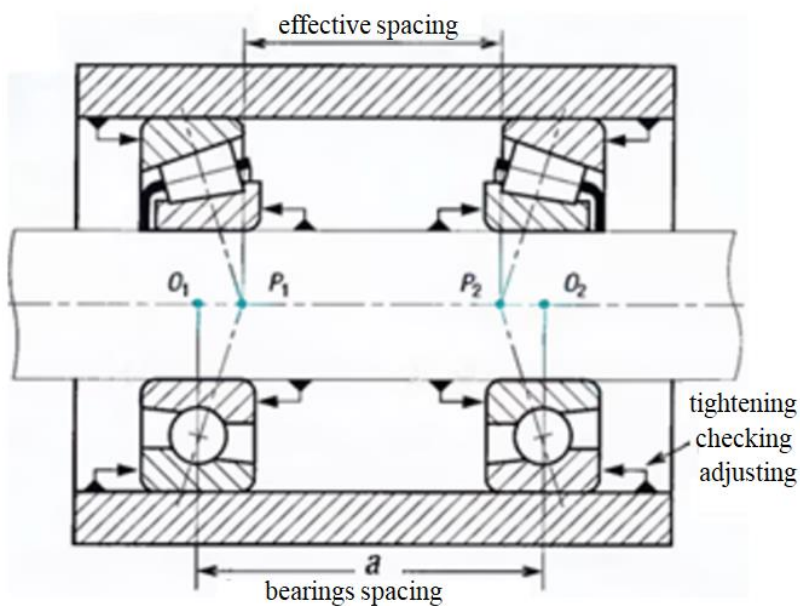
14: Assembly of a fixed shaft and rotating housing.
